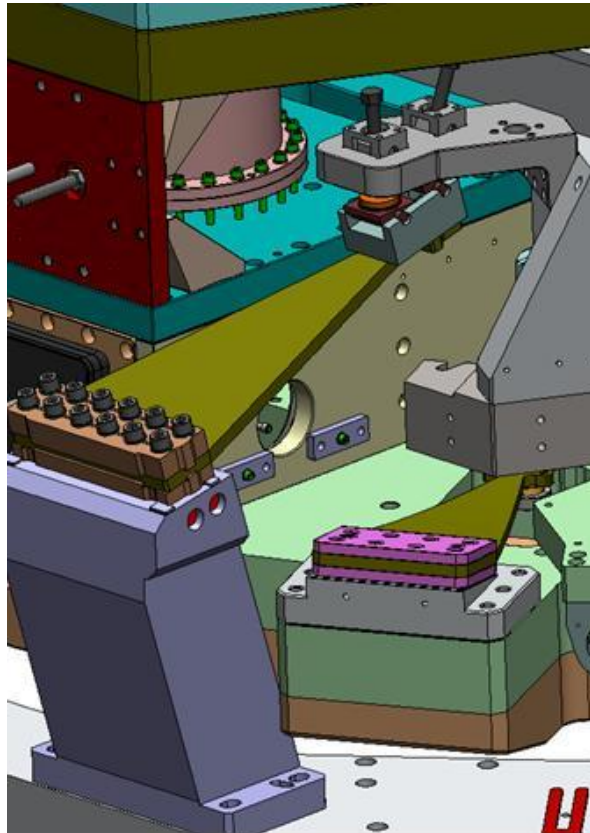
Unloaded D0901197 Stage 0-1 Blade Assembly
